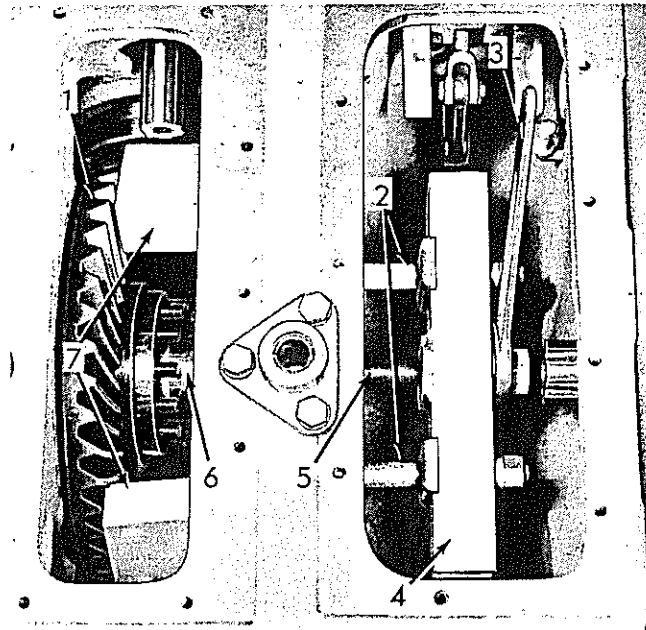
Removing Bevel Gear Shaft (T-17887)
